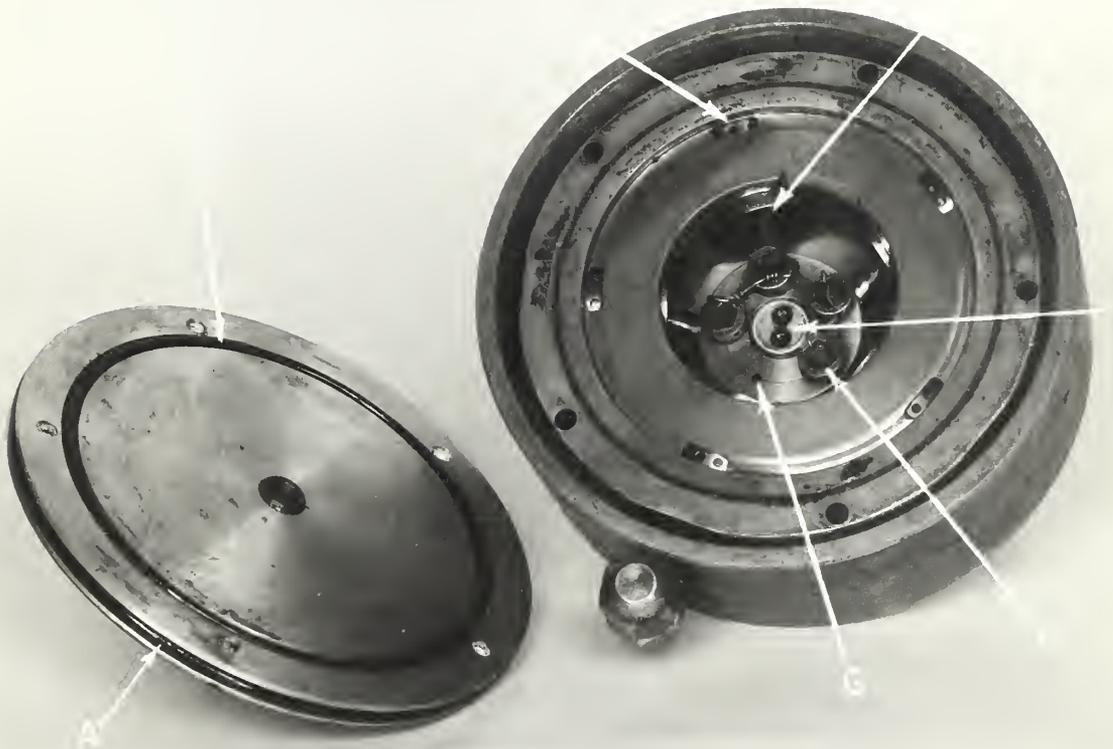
shows an interior view of the compressor with the round cover plate opposite the hub removed from the compressor housing. This plate was fastened to the compressor housing with 5 Allen head bolts screwed into tapped blind holes. Synthetic rubber gaskets of the O-ring type were used at A and B to seal the casing and to separate the high pressure side and the low pressure side of the compressor. The five cylinders discharged into a common annular space just inside the periphery of the housing and the suction gas entered the crankcase at the center of the compressor. The lower end of one of the five pistons, which were arranged radially in one plane, is visible at D. The master connecting rod is shown at G and the other four link connecting rods were attached to it with link rod pins as typified at F. The end of the crankshaft is shown at E. Refrigerant gas was admitted to each cylinder from the crankcase through the port indicated at C and 20 holes around each cylinder sleeve which were uncovered at the bottom of the piston stroke. Three of these holes are visible through the port at C.
